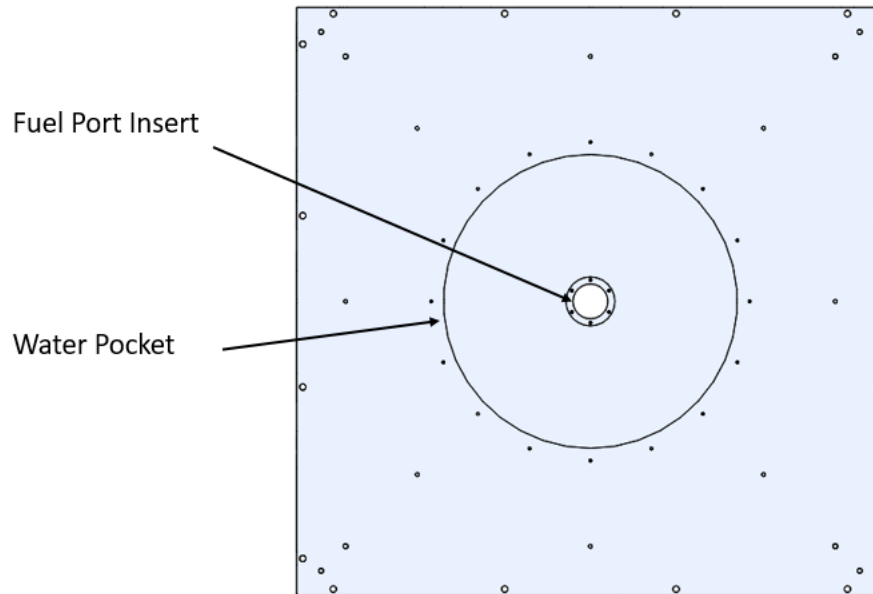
Burning surface plate with machined water pocket and fuel port insert.
